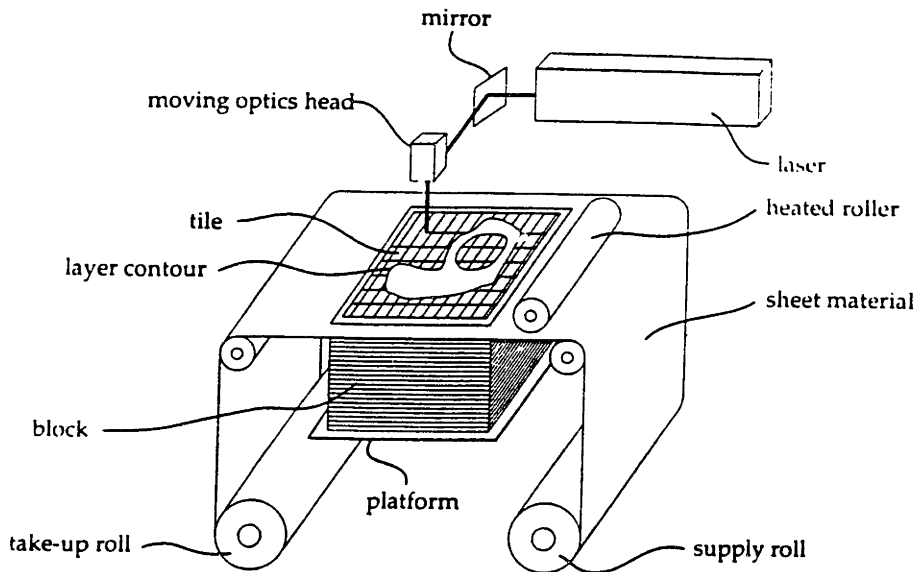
Configuration of a Laminated Object Manufacturing machine. (Rapid Prototyping Report, 1991)
